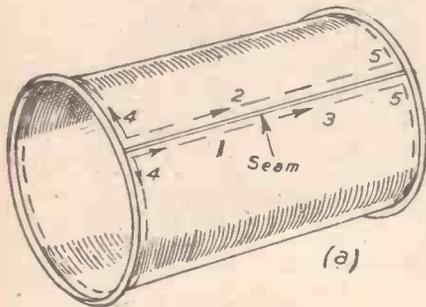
Method of cutting a tin container and flattening the tinplate.
